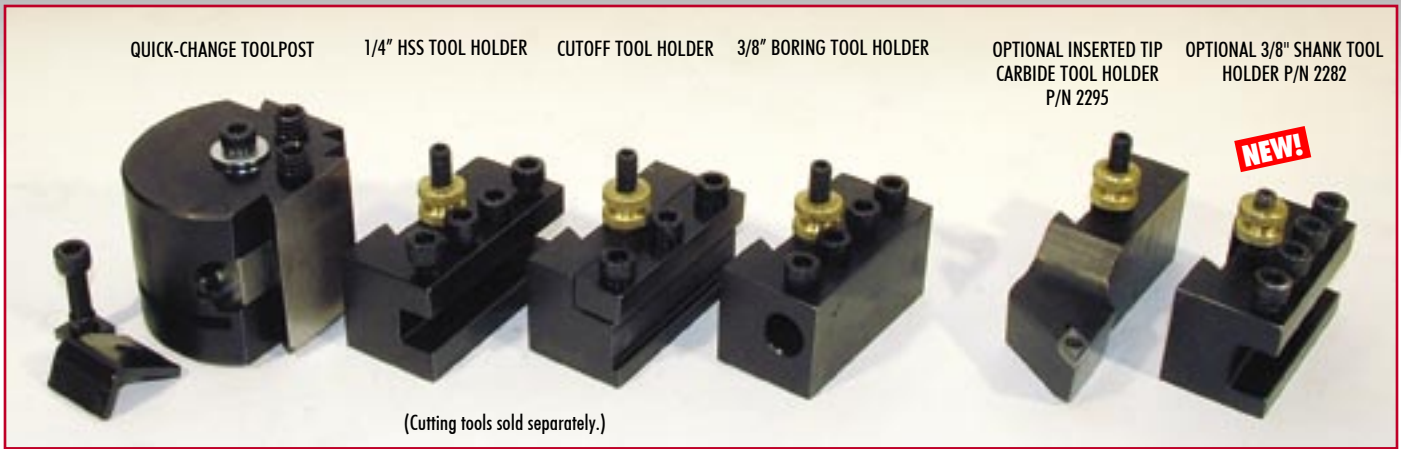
The tool post at the left has two machined dovetails to accept the various holders. The three holders to the right of the tool post come with the P/N 2250 set. They hold (L to R) a 1/4" HSS cutting tool, a cut-off blade and a 3/8" round boring bar. A clamp and T-nut are included. To the right of the photo are two optional holders. P/N 2295 comes with a 55° carbide insert and P/N 2282 holds 3/8" square shank tools like the 2256, 2257, 2265 and 2267. The post and holders are all machined from steel and have a black oxide finish. Knurled brass knobs adjust tool height.
